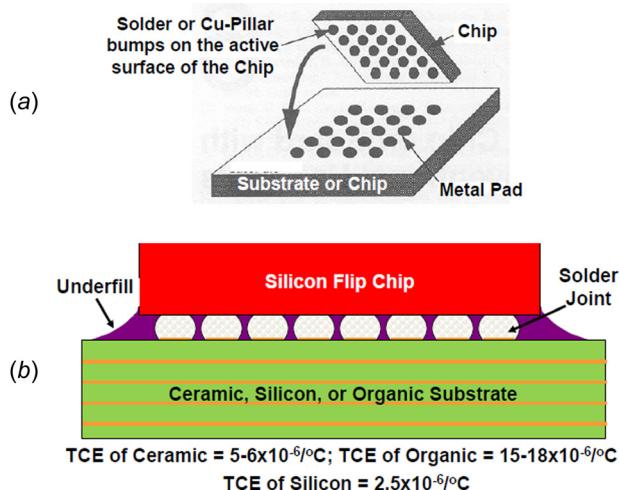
(a) Definition of flip chip assembly and (b) flip chip assembly on various substrates
